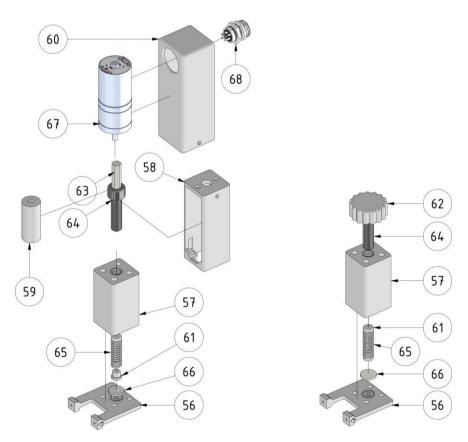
Exploded-view CAD drawings of the motor-controlled BPR and the manual-controlled BPR.
